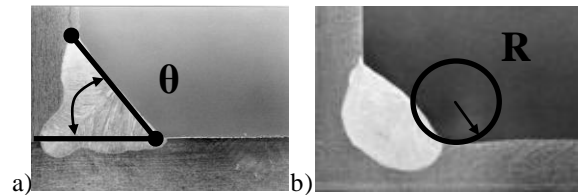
a) Weld toe tangent angl; b) Weld toe radii
